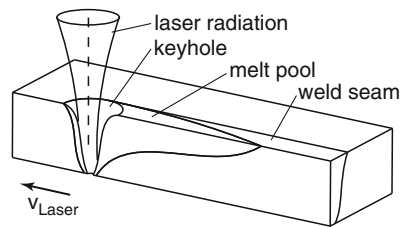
Half section sketch of the deep welding interaction zone
